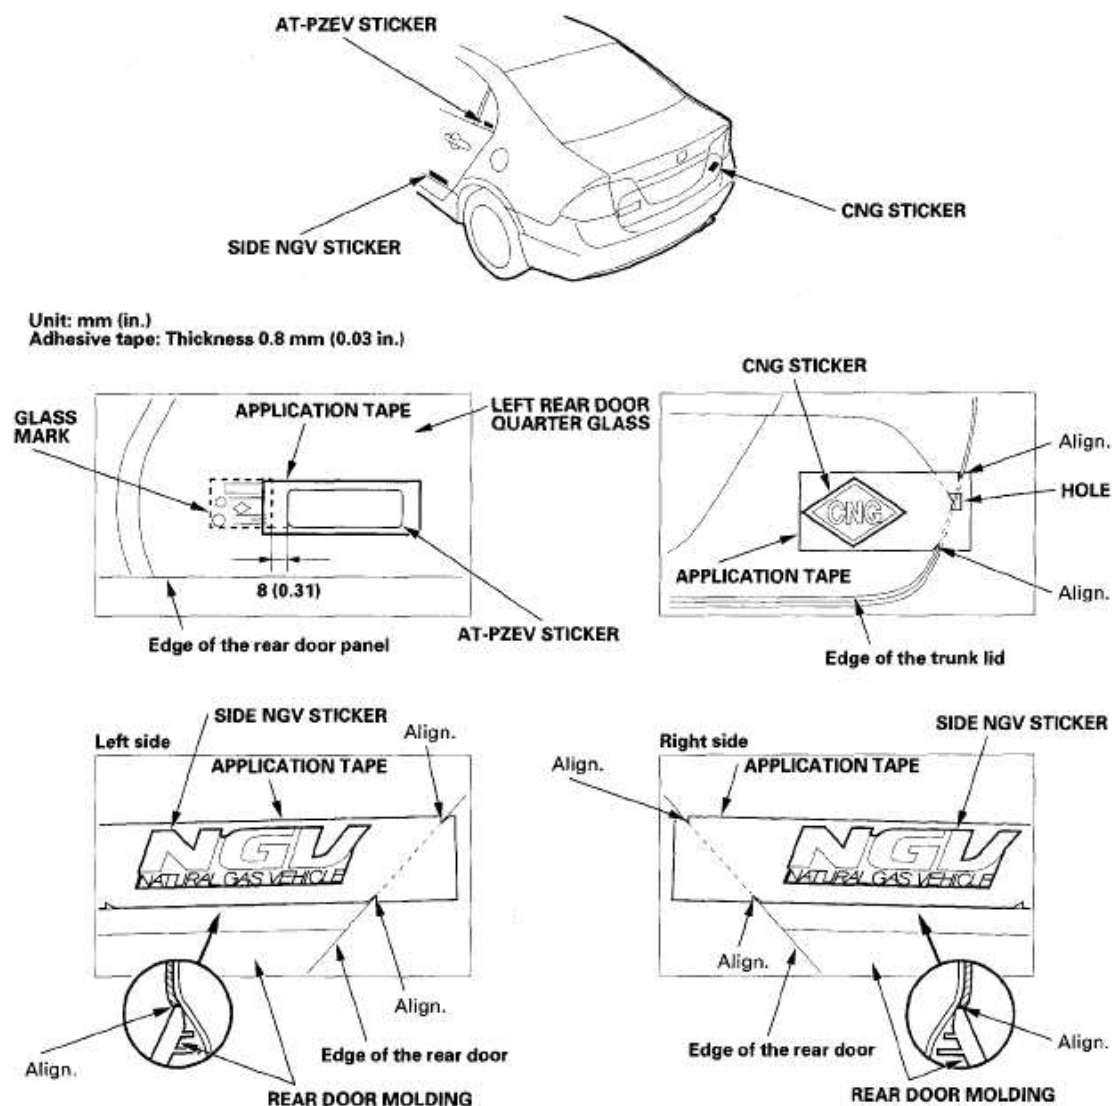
Identifying Side NGV Sticker And Rear Door Molding
